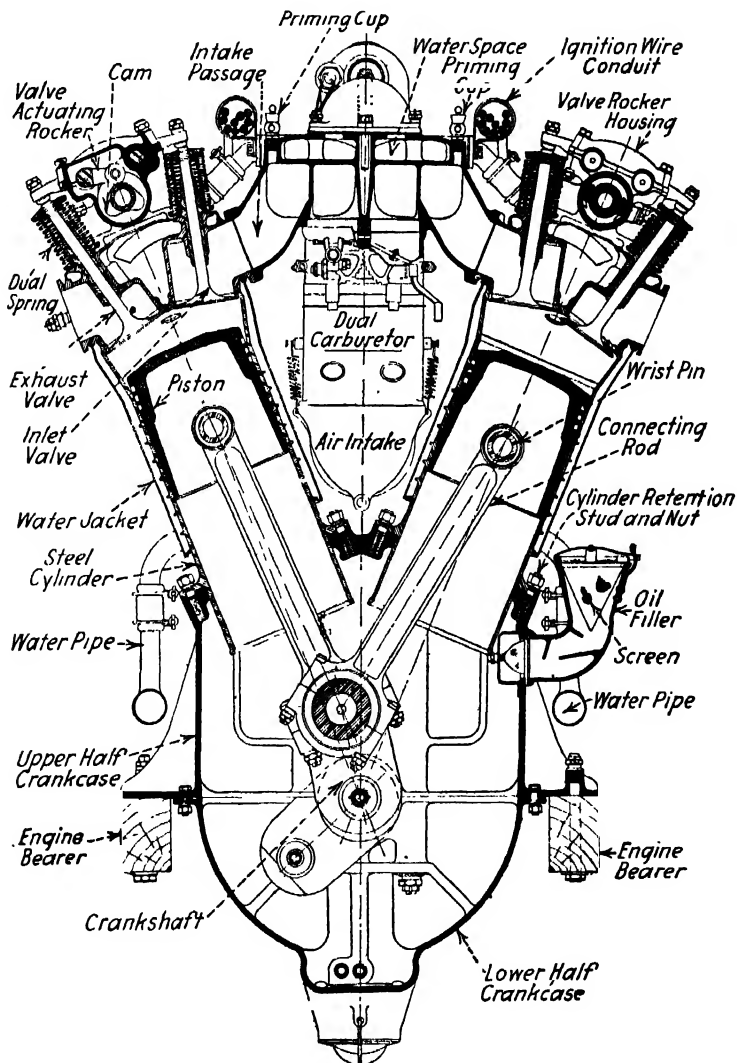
Transverse Section through Liberty Engine Showing Cylinder and Piston Construction, Connecting Rod Design and Valve Gear.
